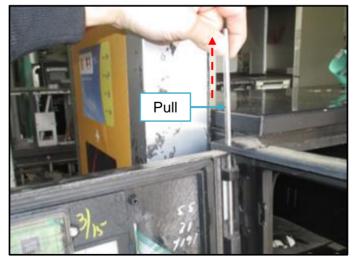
Remove hinge pin and keep. Discard the hinge pin.
